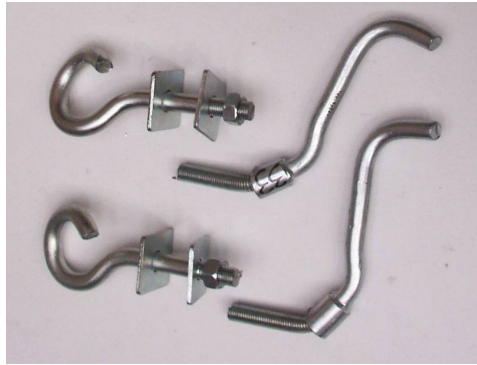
Nut hook M16 after the bending tests F_Y , hook-thread type.
